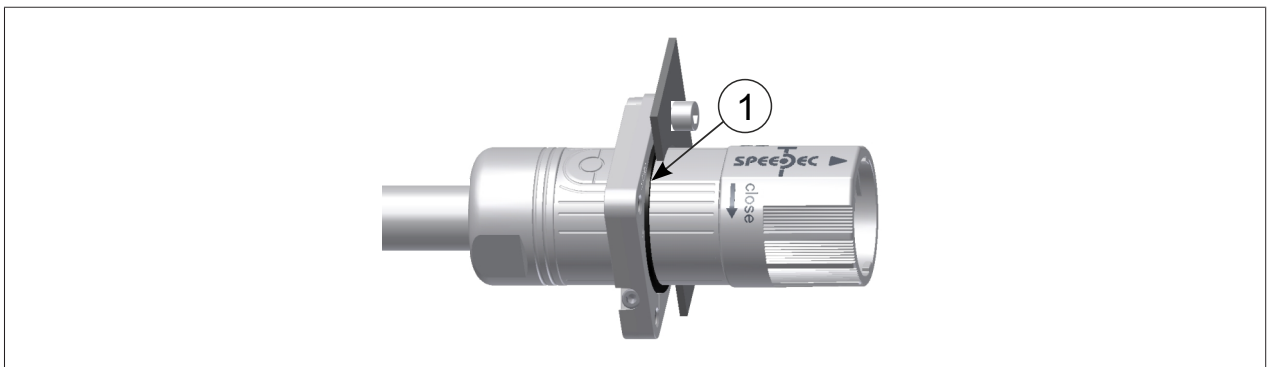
Attaching the metal flange to the connector (rear panel installation)
